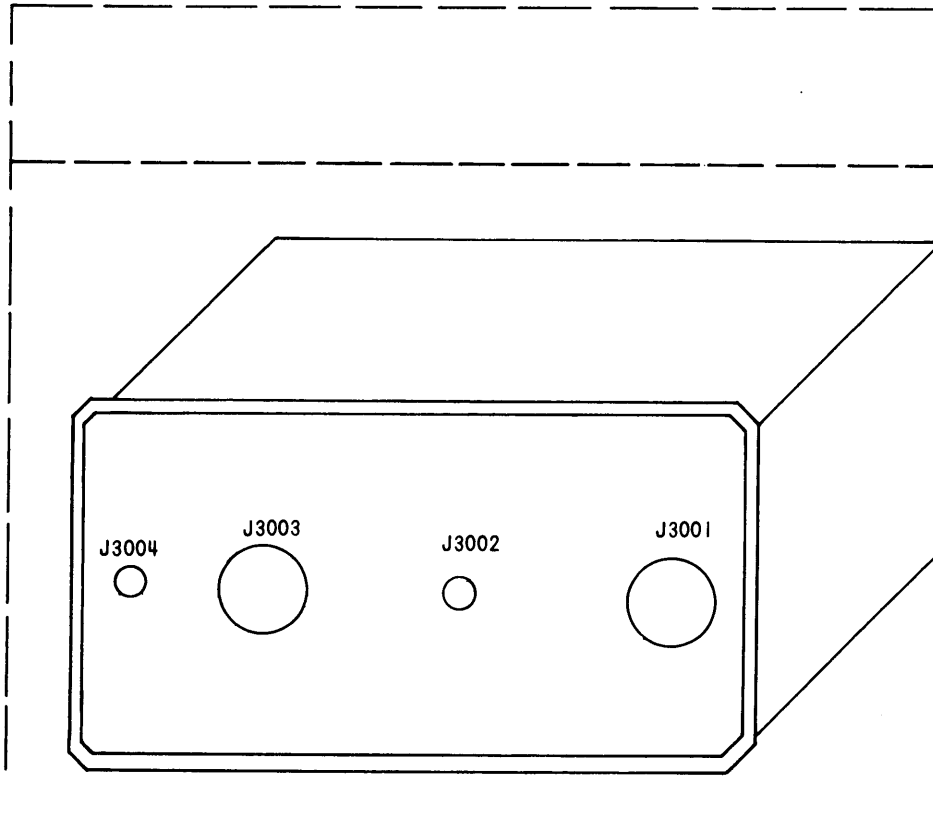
Exciter Remote Assembly (As Viewed From Rear of Transmitter)
